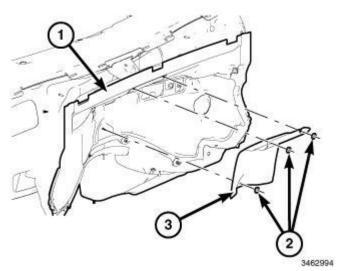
Dash Extension Heat Shield & Fasteners Courtesy of CHRYSLER GROUP, LLC
